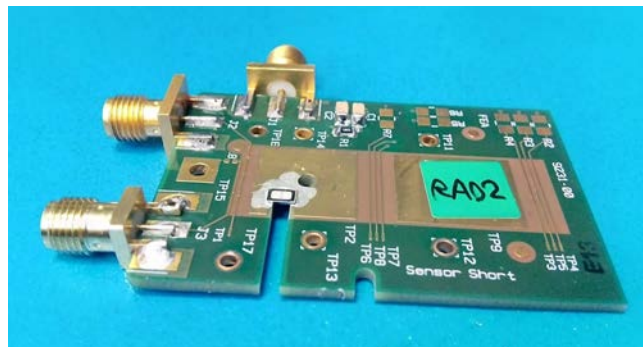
Picture of an RA array assembled on the PCB for edge-TCT.
